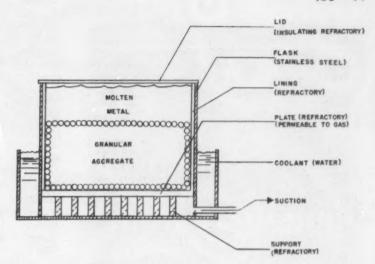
Mold with water cooling trough for solidifying cellular metal castings.
